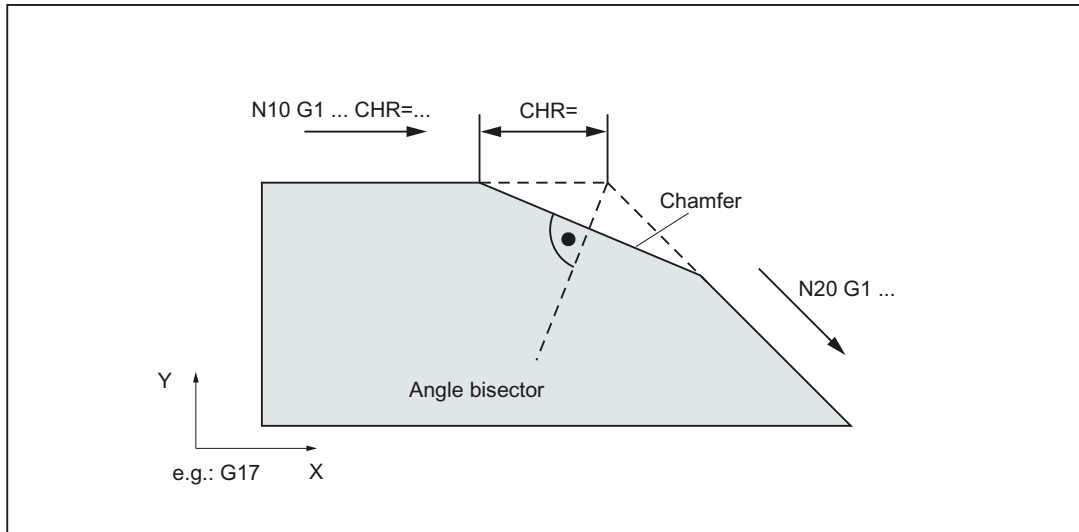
Inserting a chamfer with CHR using the example: Between two straight lines
